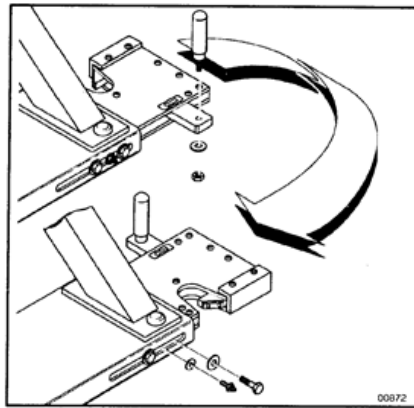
Rear Base Extension (Docking Clamp) Reversal.
